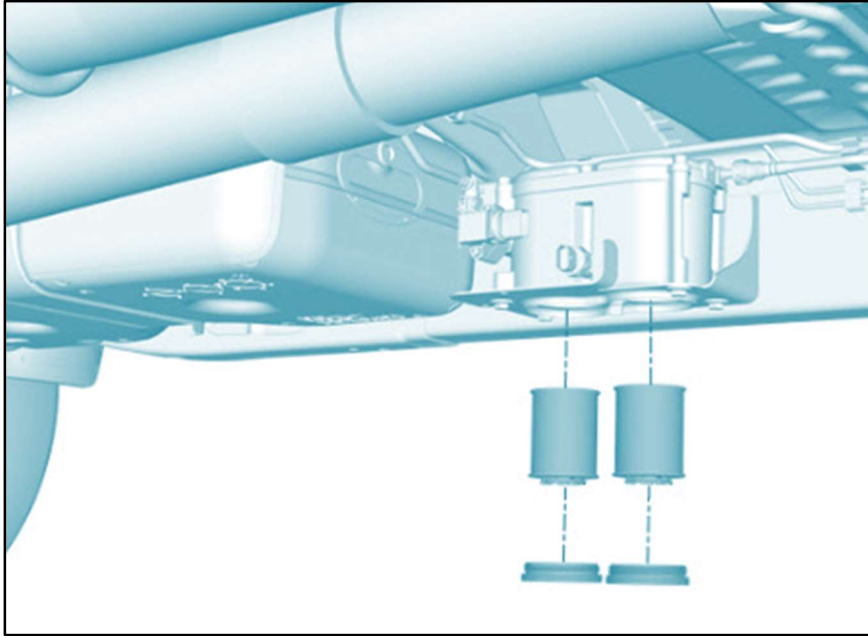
, 2.8L LWN Fuel Filters and Fuel Filter Assembly
